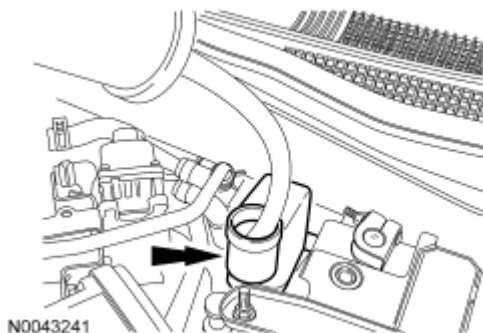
Locating Brake Fluid To Clutch Reservoir Hose
